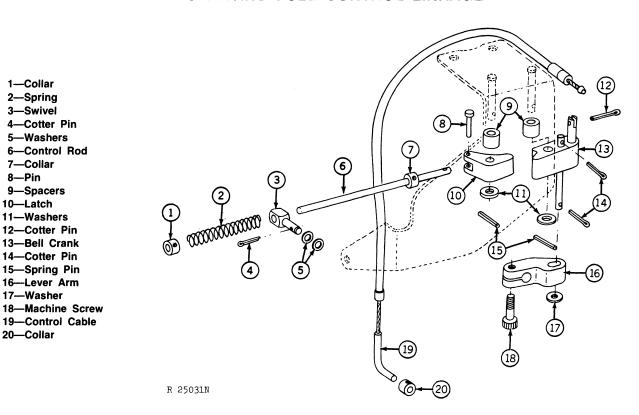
Starting Fuel Control Linkage (Exploded View)
